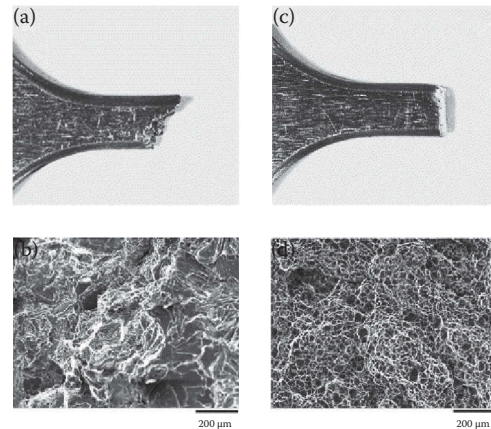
Fracture surface of as-cast specimens (a and b) and friction stir processed specimens (c and d)^[73]
